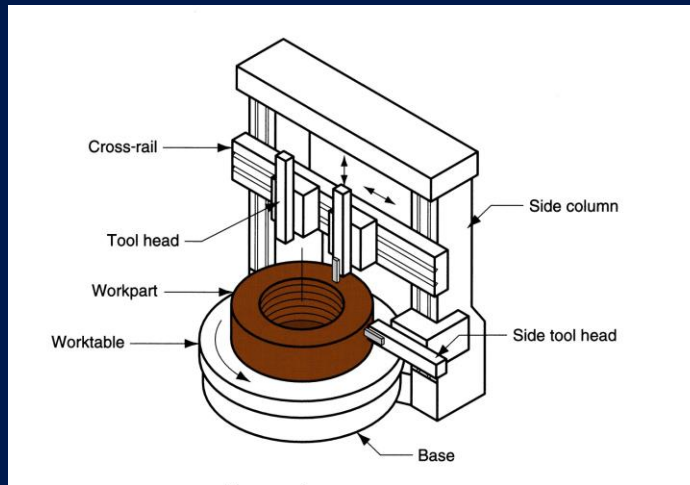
A vertical boring mill –for large, heavy workparts
